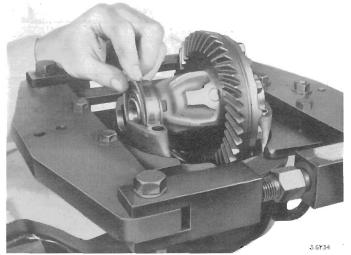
Using a Churchill spreading tool to release the differential carrier
